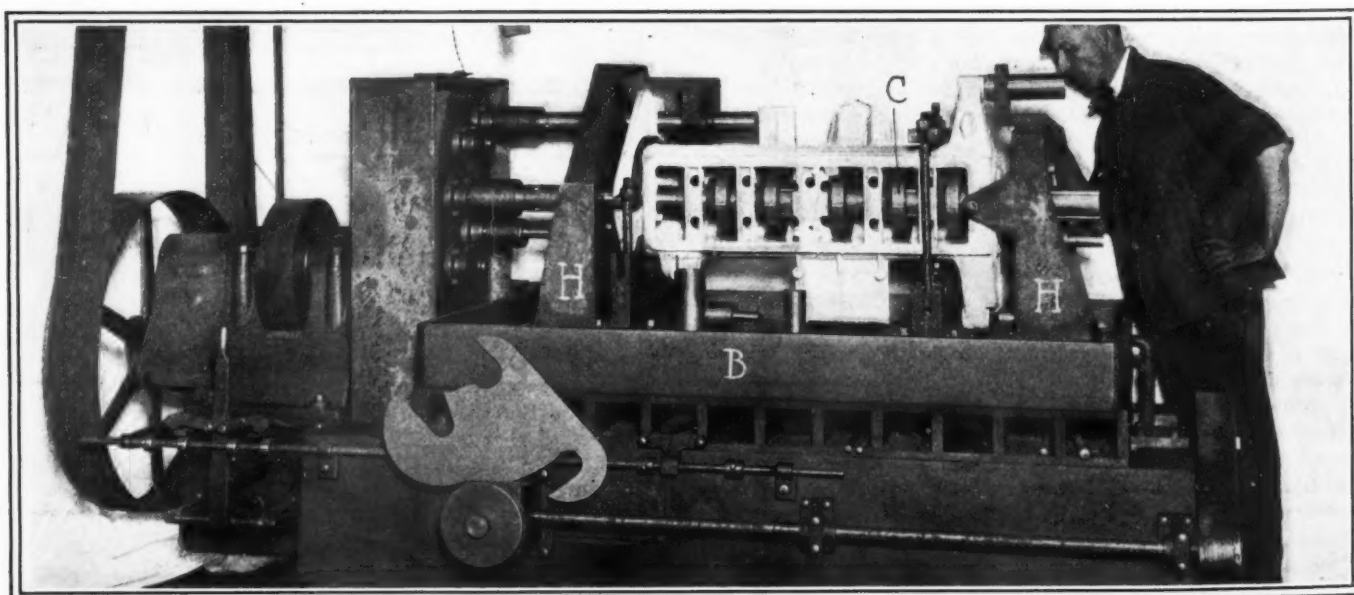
First operation on Marmon crankcase, showing special machine boring all of the crankshaft and all of the camshaft bearings at one time
